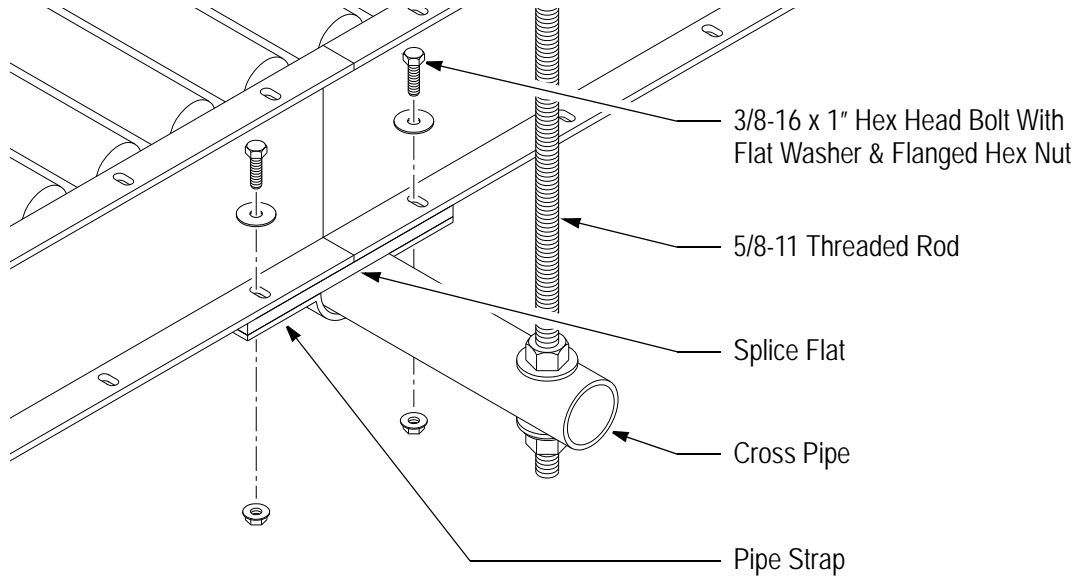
Installing a Ceiling Hanger Centered on a Section Joint
